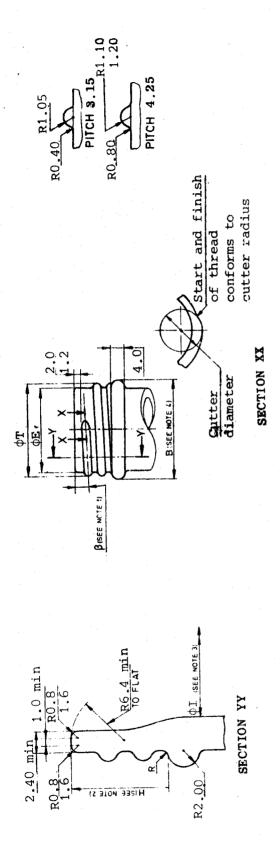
Roll on thread non-pilferproof finishes (All dimensions in millimetres)
